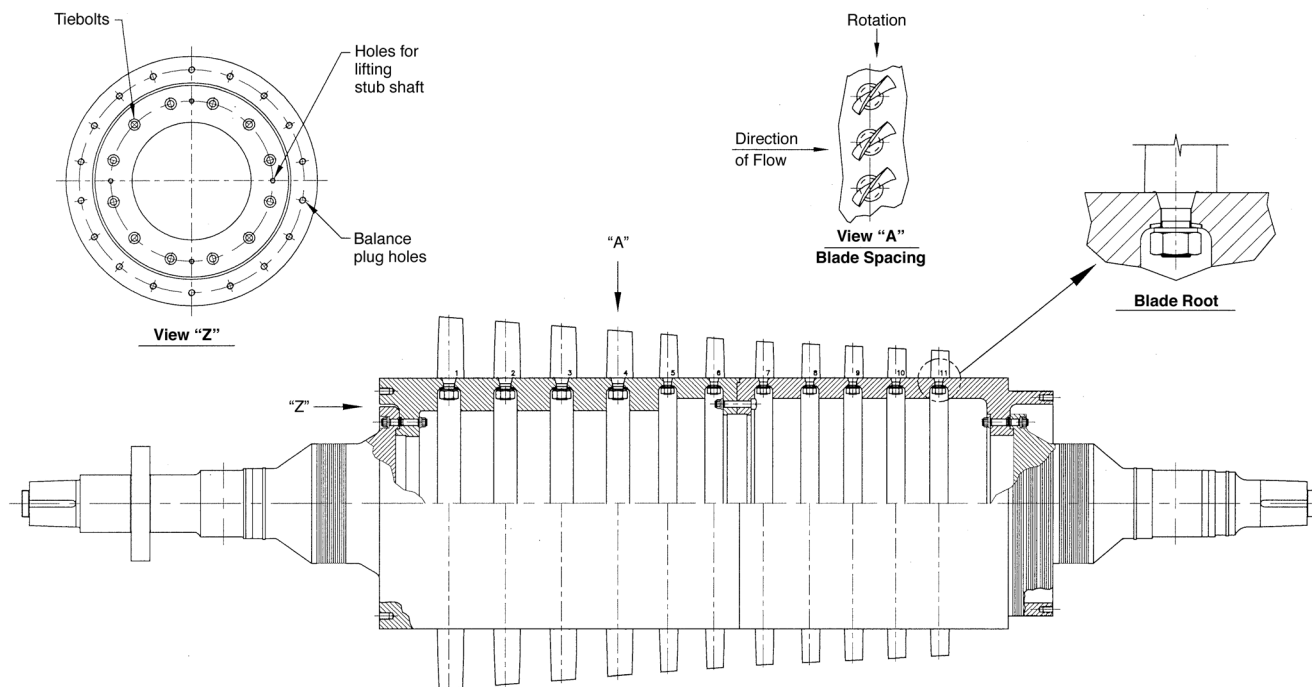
Axial Compressor Rotor Construction: Drum Rotor with Studs
